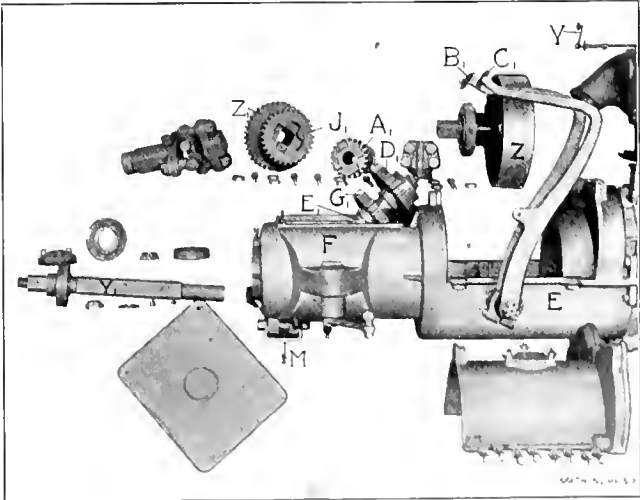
Clutch and Transmission Gear Members Dismantled to show Construction
